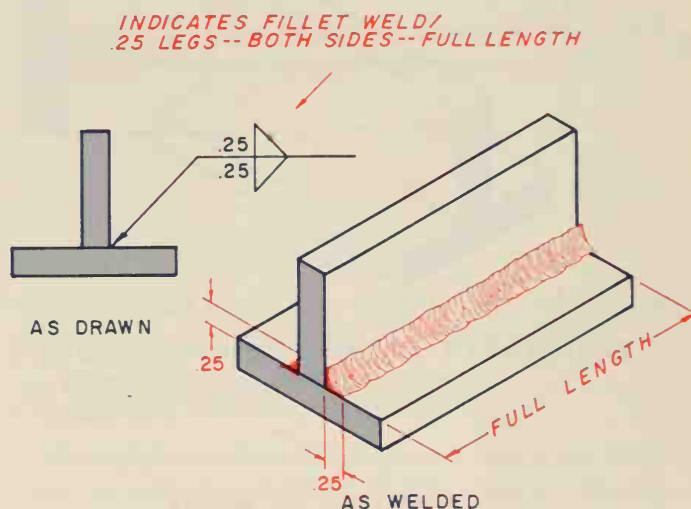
If weld length is not specified, it is assumed to be continuous full length
